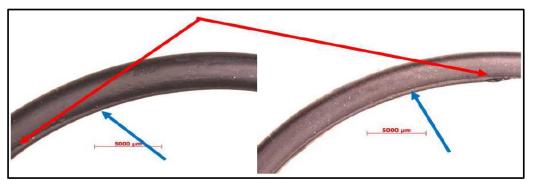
O-ring fracture initiating zone and lipped area (stereo).
